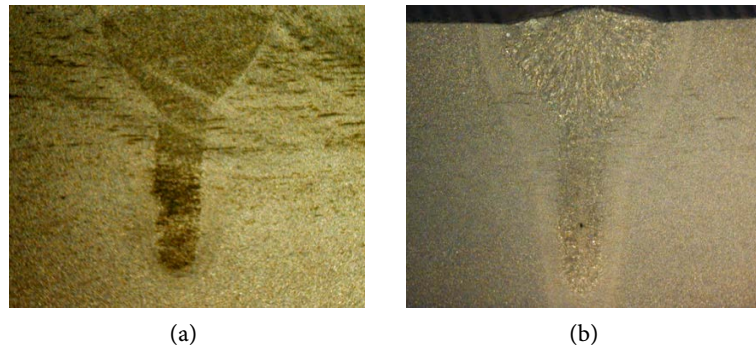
Macrographs showing weld quality produced by laser power of 5 kW, welding speed of 0.5 m/min, a defocusing distance of -0.5 mm and a shielding gas flowrate of (a) 15 L/min, (b) 30 L/min.
